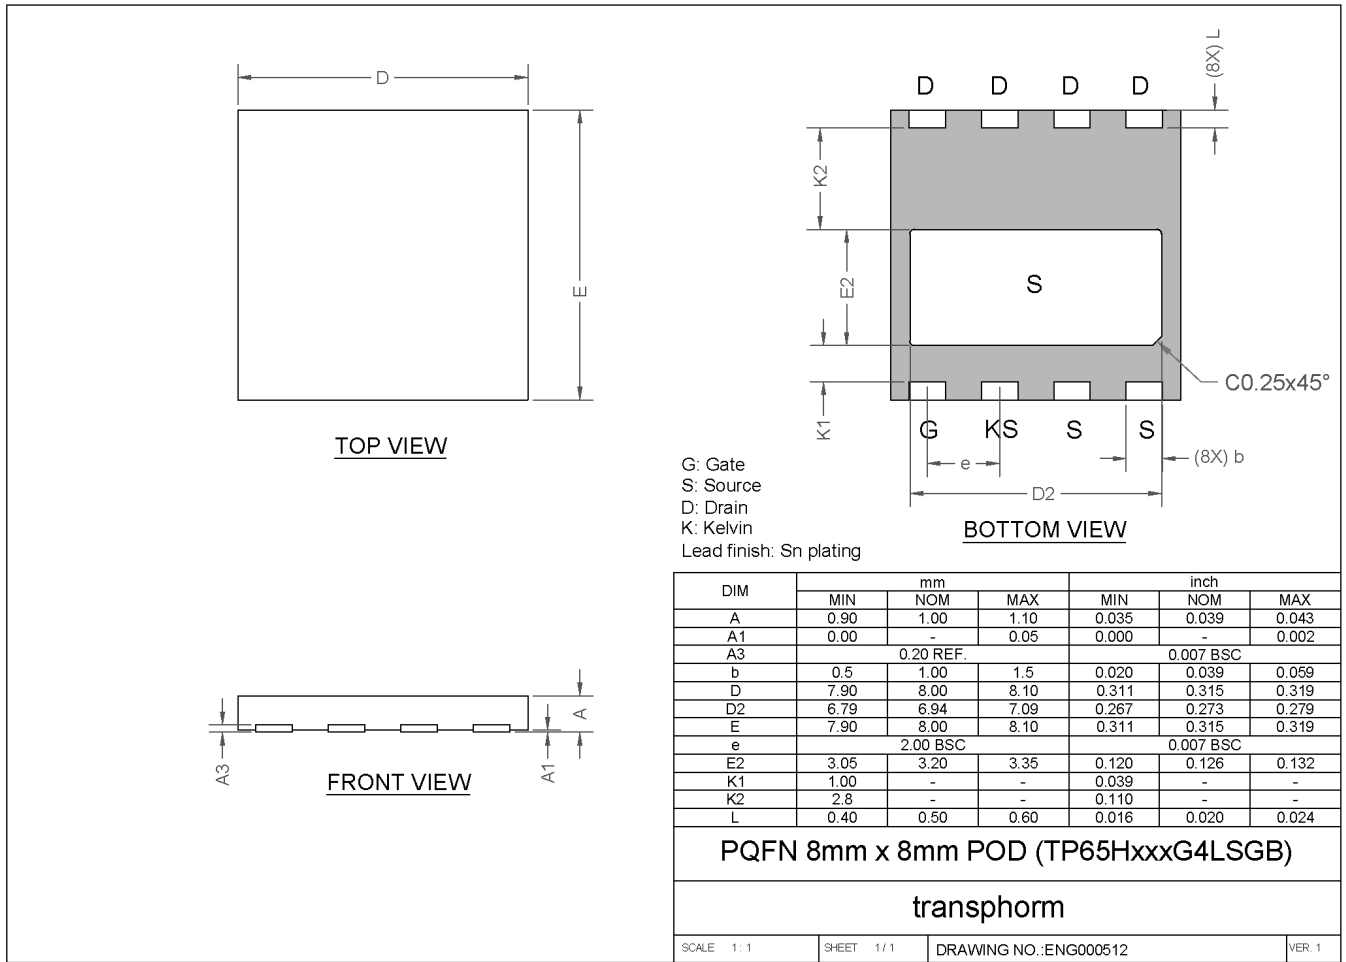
Package Outline Drawing – 8 × 8 mm PQFN
